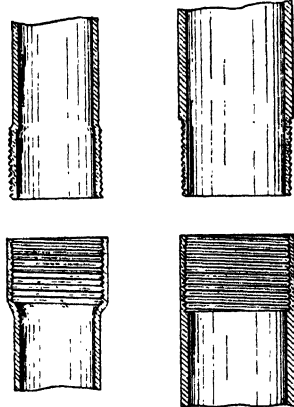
Cressed and Swelled Joint.      FIG. 133.— Flush Joint.
